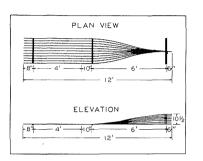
THERMOCOUPLE WELL ASSEMBLY.
